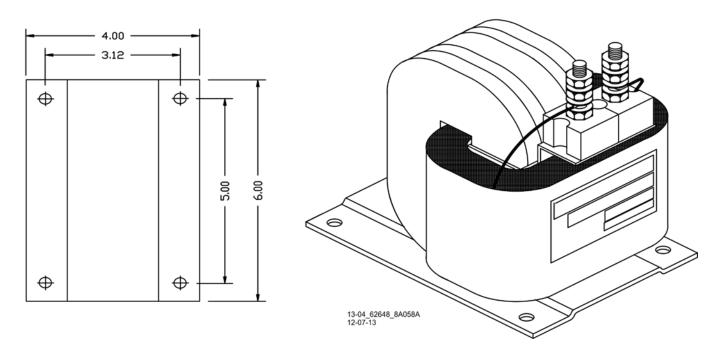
Battery Choke with Mounting Dimensions, 62648/8A065A
